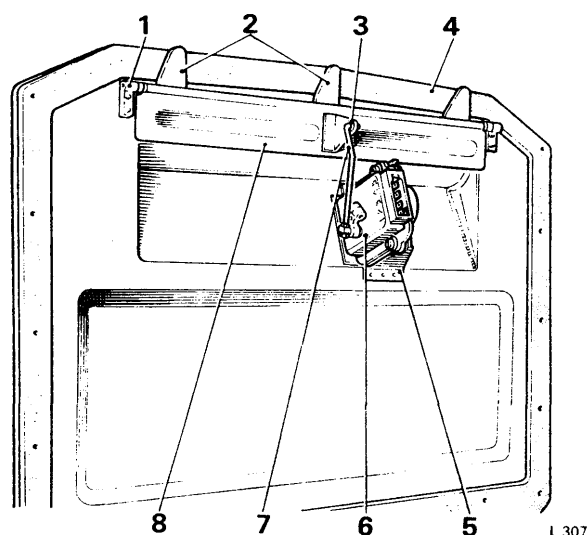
POSITION OF FRESH AIR FLAP AND ACTUATOR ON THE REAR COVER
